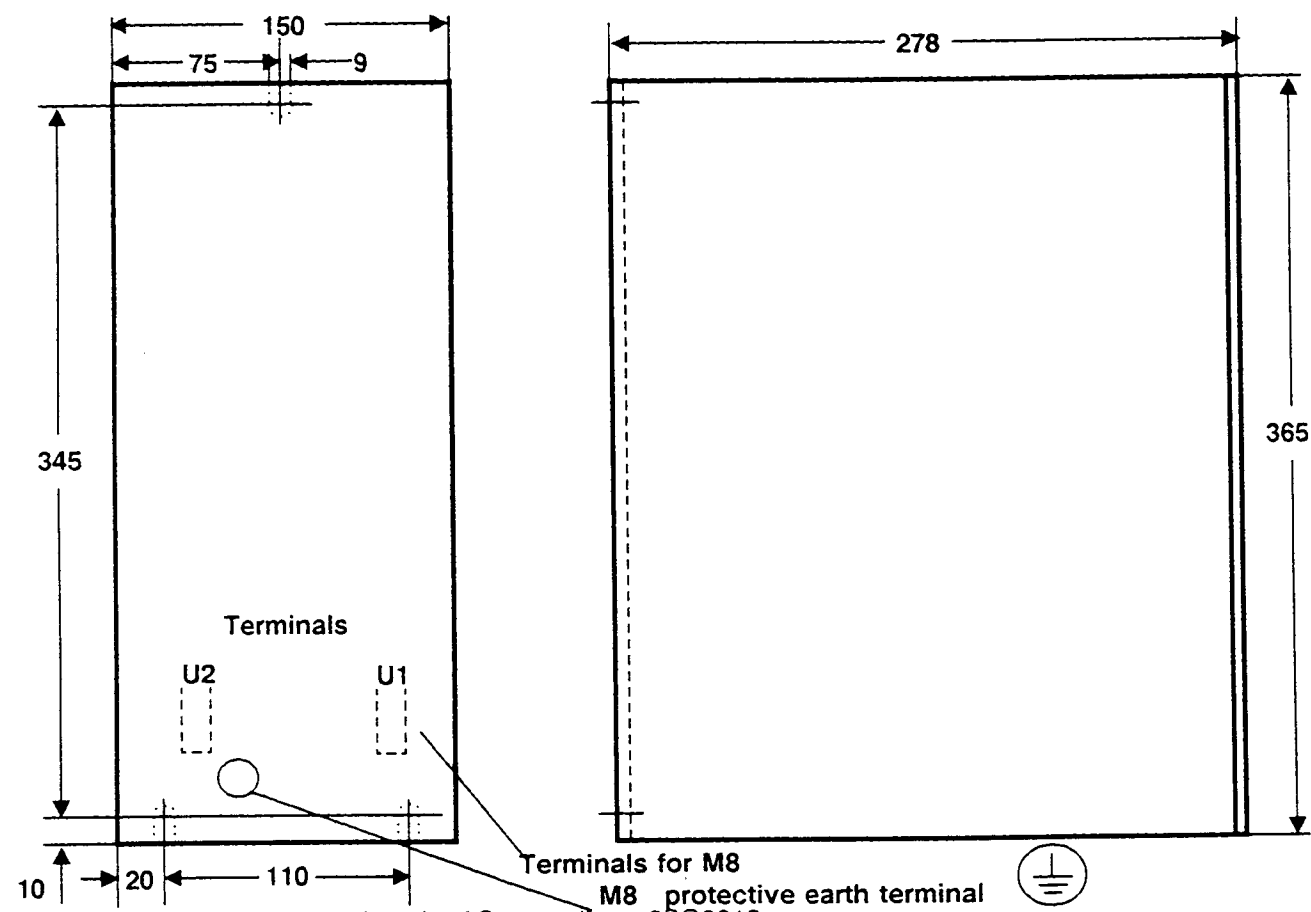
Dimension drawings for AC controllers 6SG2216
